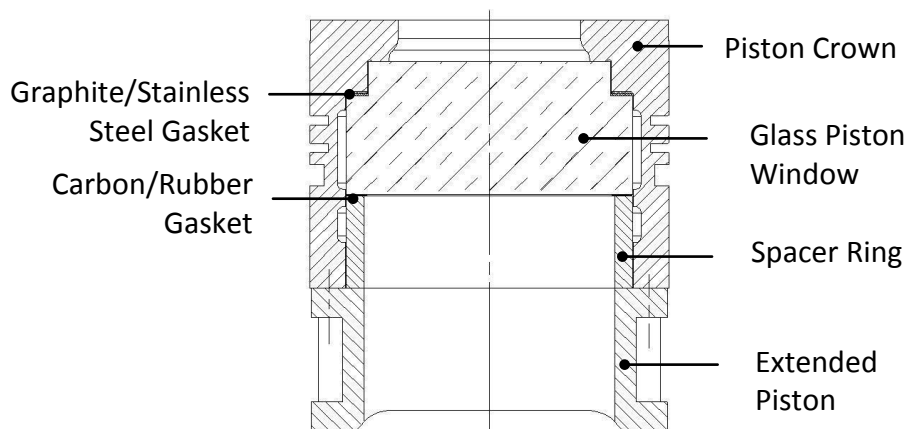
Sectional Schematic View of the Optical Layout
